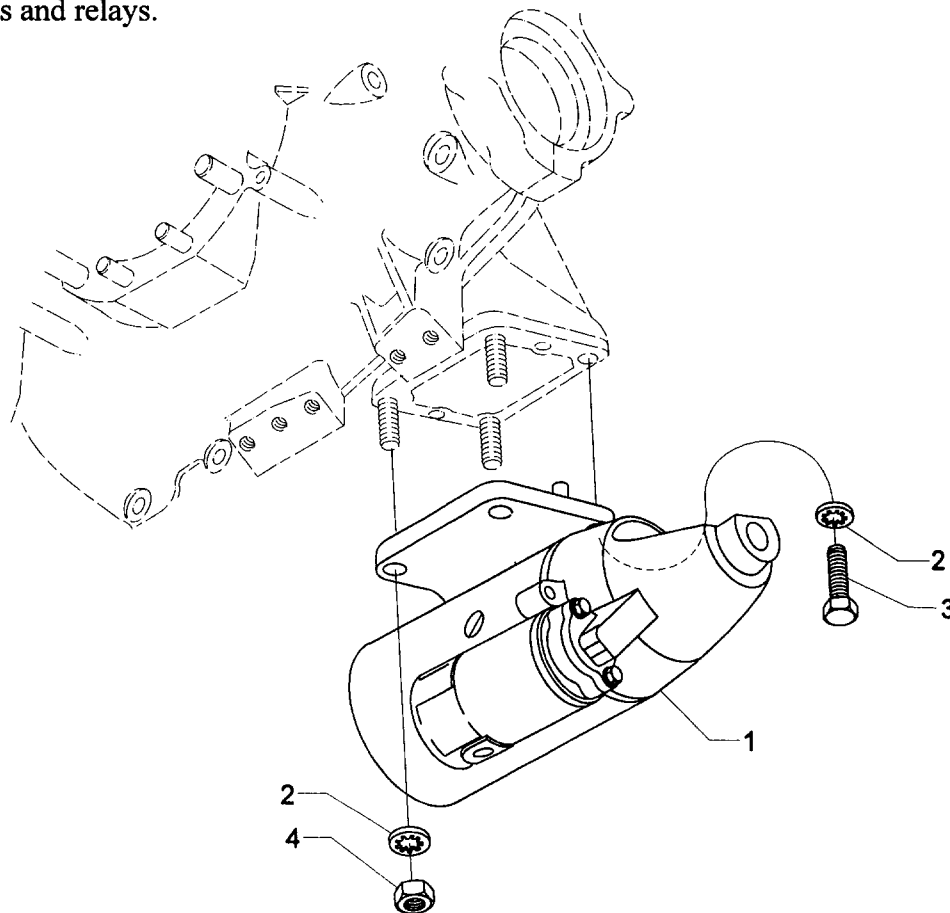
SKY-TEC STARTER AND ATTACHING PARTS
